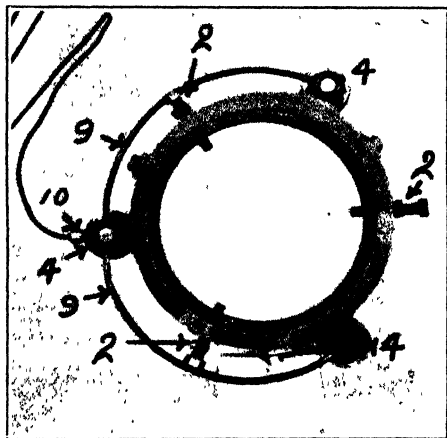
End View of Actual Mechanism, Showing the Relative Position of the Bellows, Clamping Screws, Spacing Bars and Connecting Tubes.
